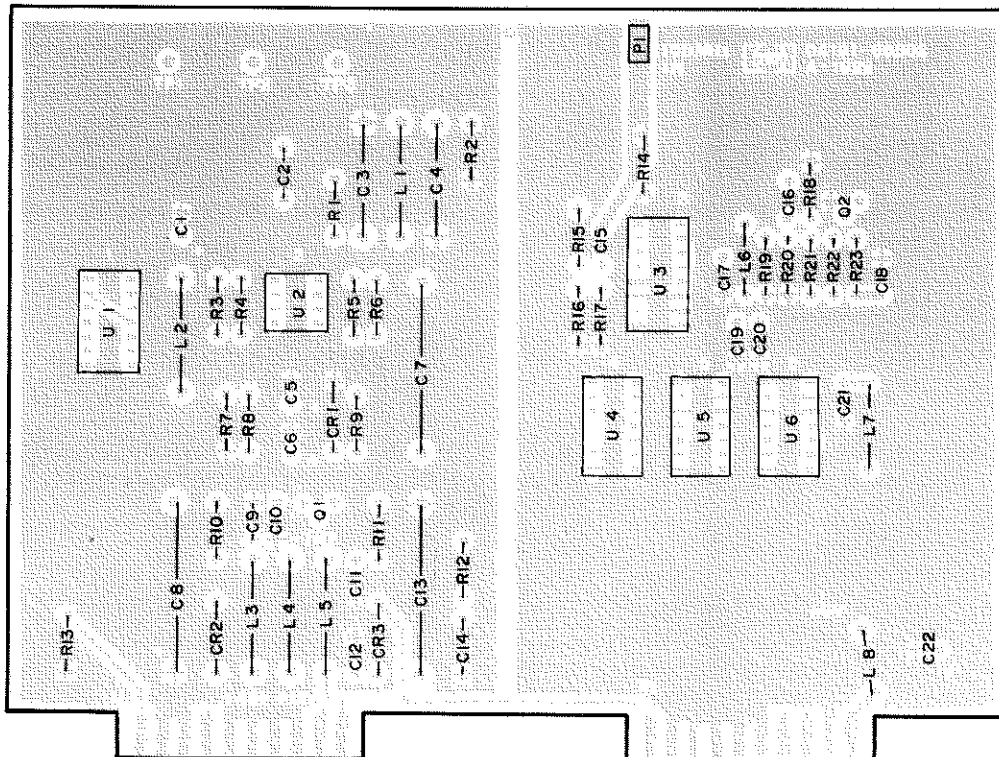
A3 Synthesizer Phase Detector Board Assembly Component Locations.
